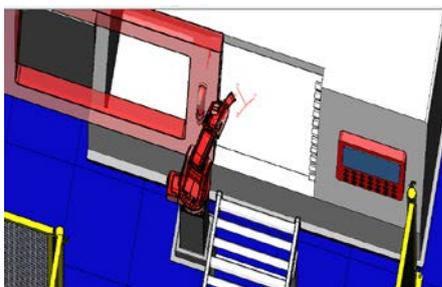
Collision warning of industrial robotic arm with CNC milling machine doors
